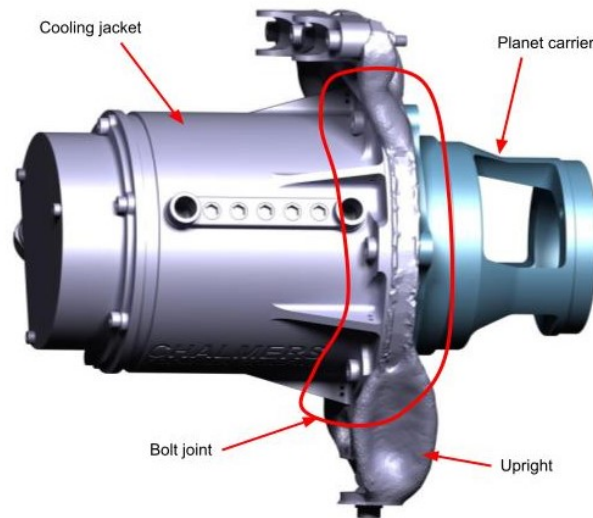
Bolted joint between cooling jacket, upright, and gearbox on the CFS22 wheel assembly.
